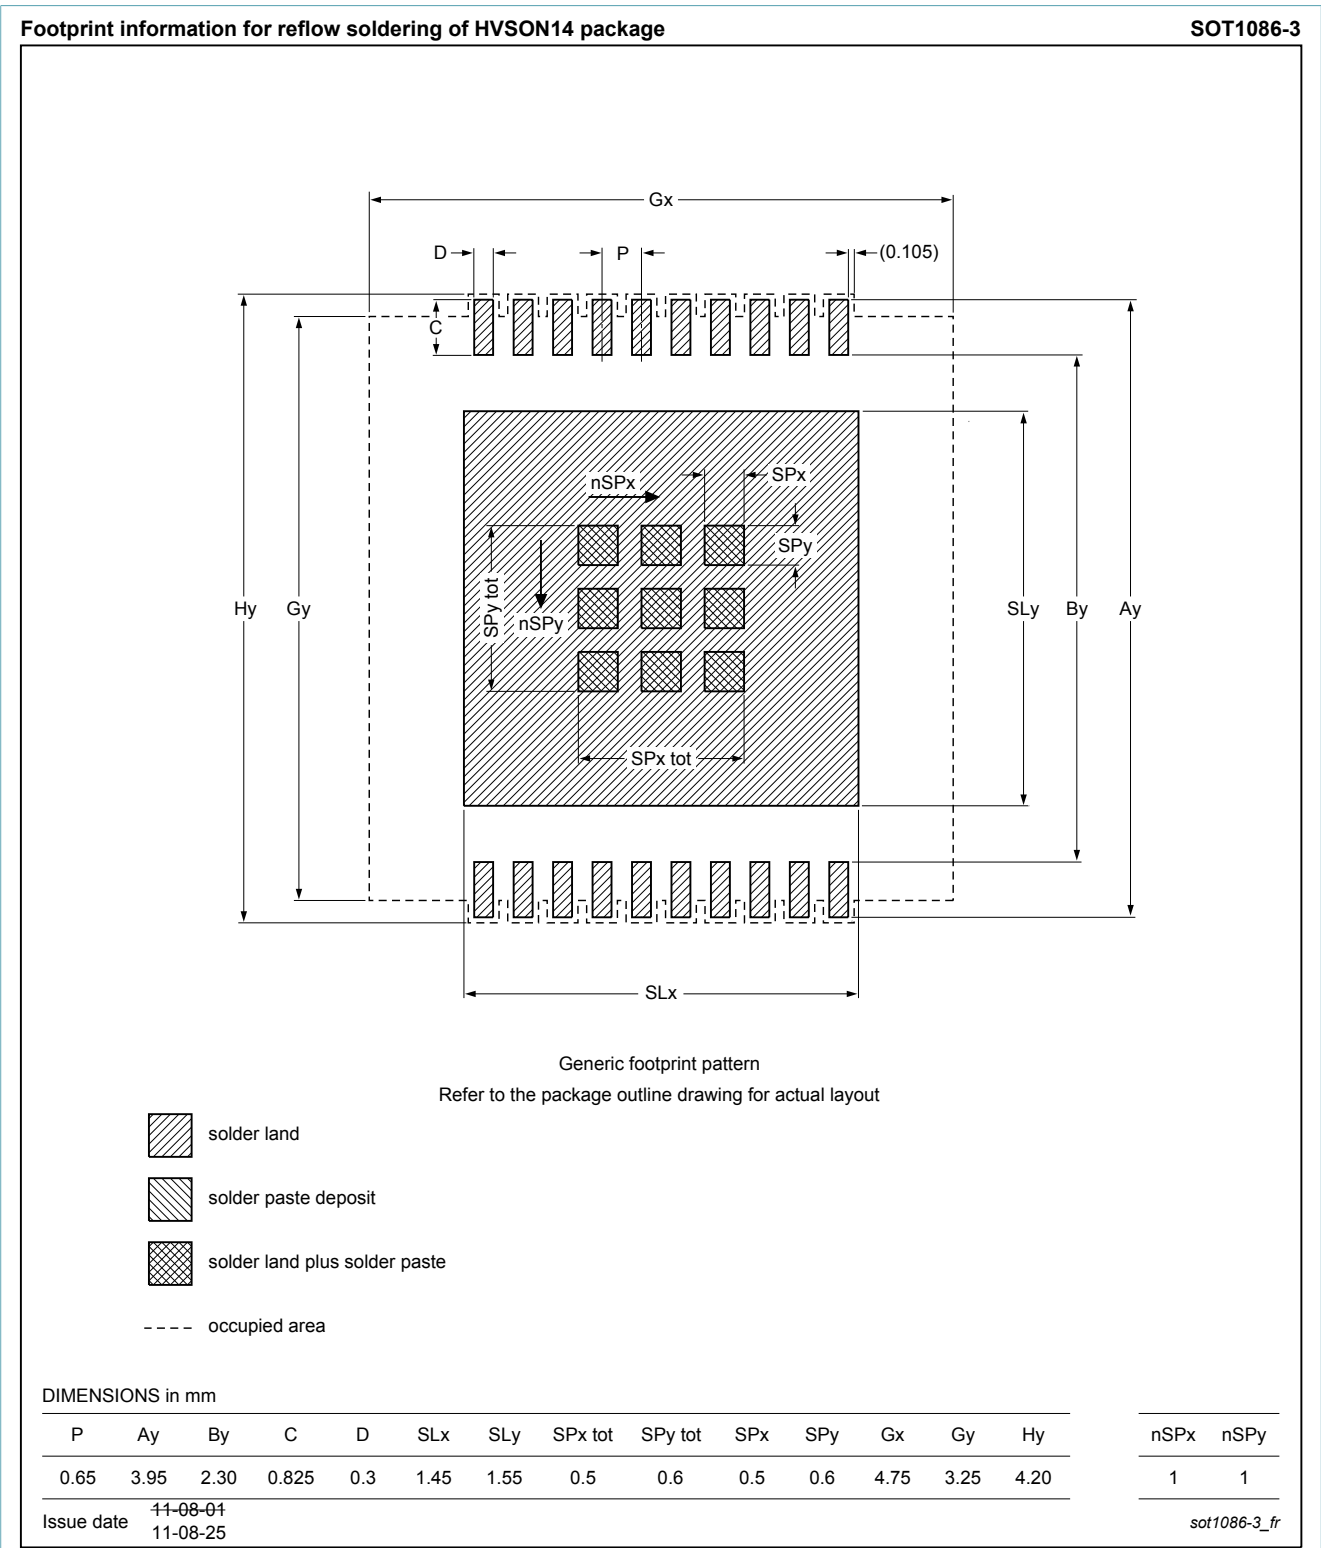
Reflow soldering footprint for HVSON14 (SOT1086-3)
